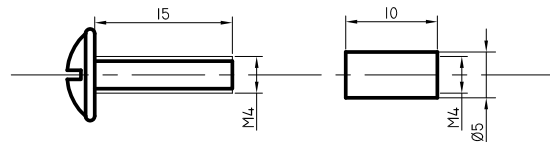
Dimensions (in mm) of the steel gauge inserts.
